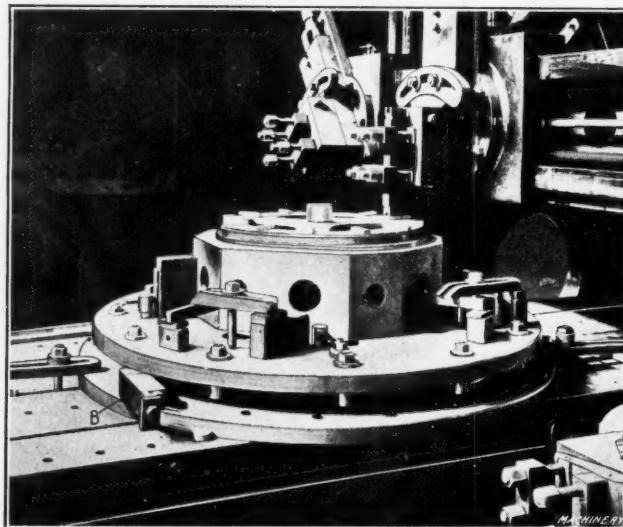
Planer Indexing Fixture with the Lock Mechanism B swung back
